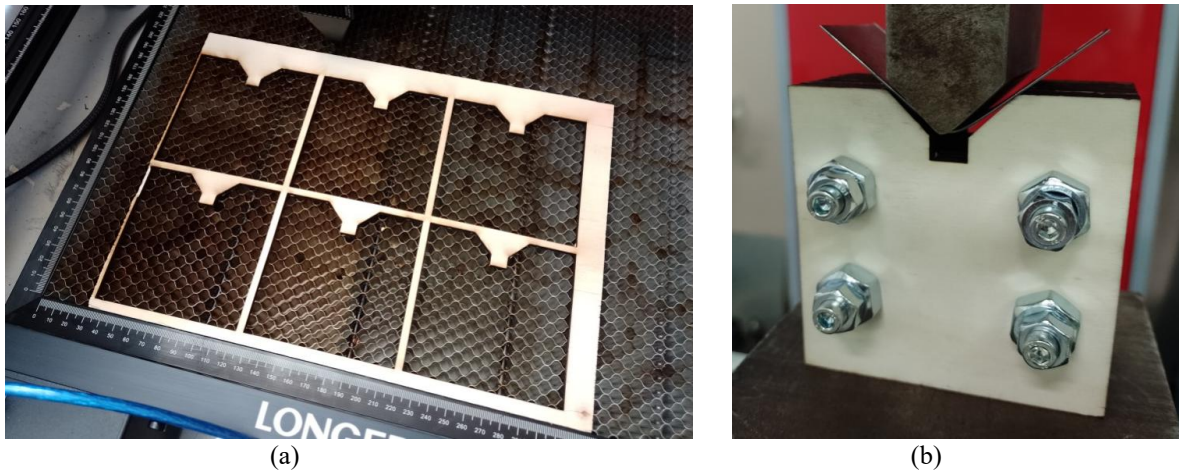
Plywood used for laser cutting (a), Bending die made of plywood used in experiments
